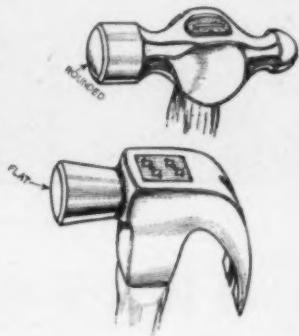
A carpenter's hammer (below) should never be used for striking hard metal, as the face is flat. A mechanic's hammer has a rounded face and is designed for this purpose.
